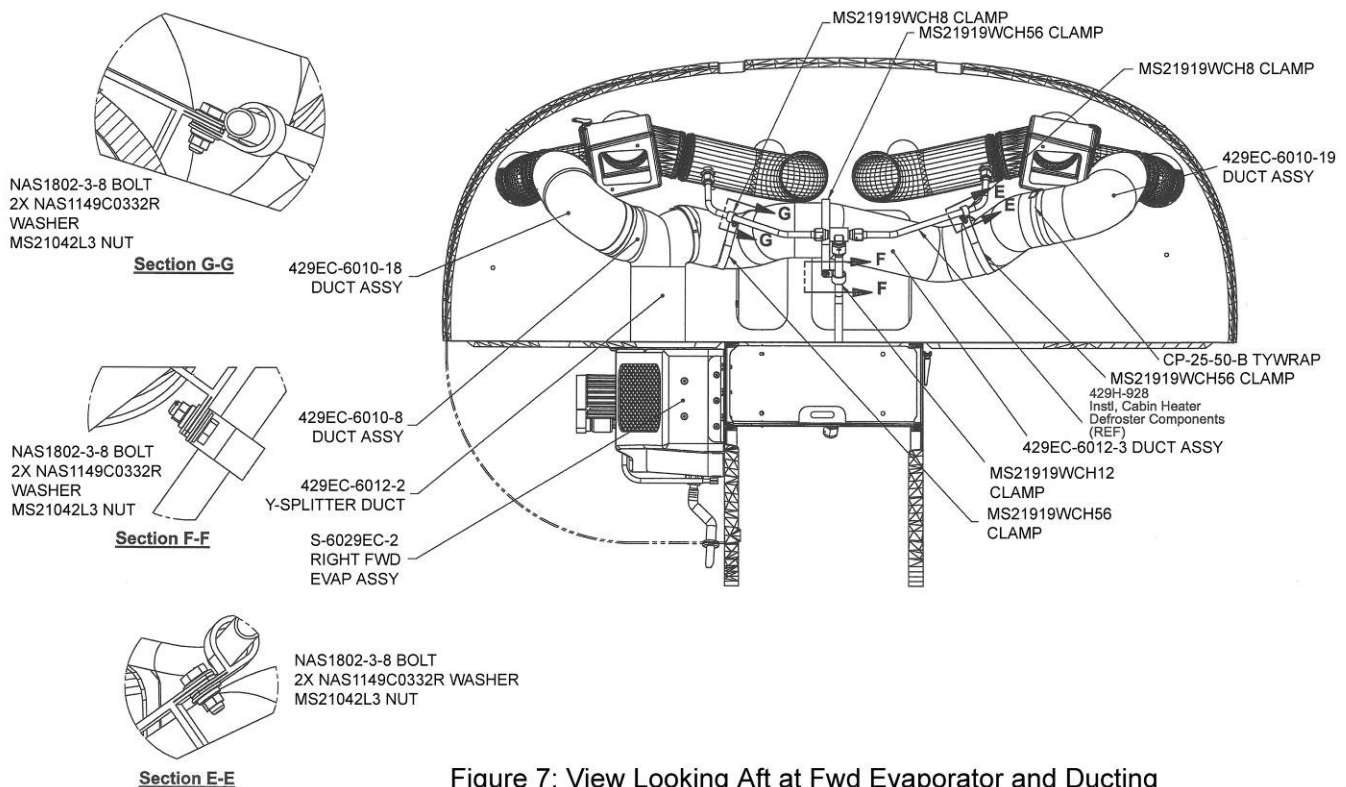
View Looking Aft at Fwd Evaporator and Ducting
